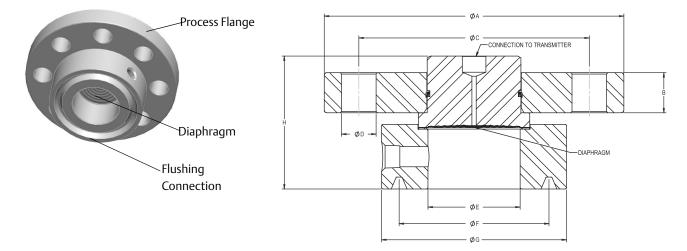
RCW Flanged Remote Seal Ring Type Joint (RTJ) and Flushing Connection Ring
